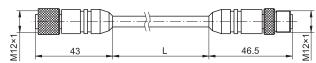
Connecting cable BSK-S103/GS203-CP-...
